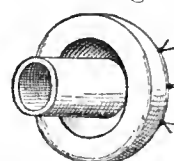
Inside view of collar with rubber tubing sewed on.
